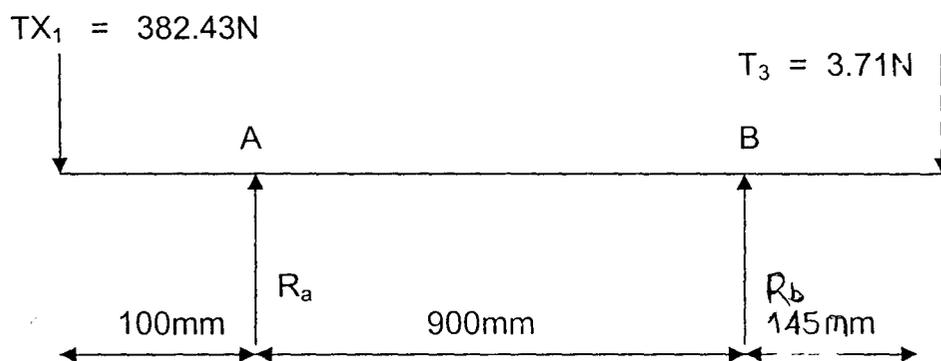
Loading of Cylinder Shaft in Horizontal direction
